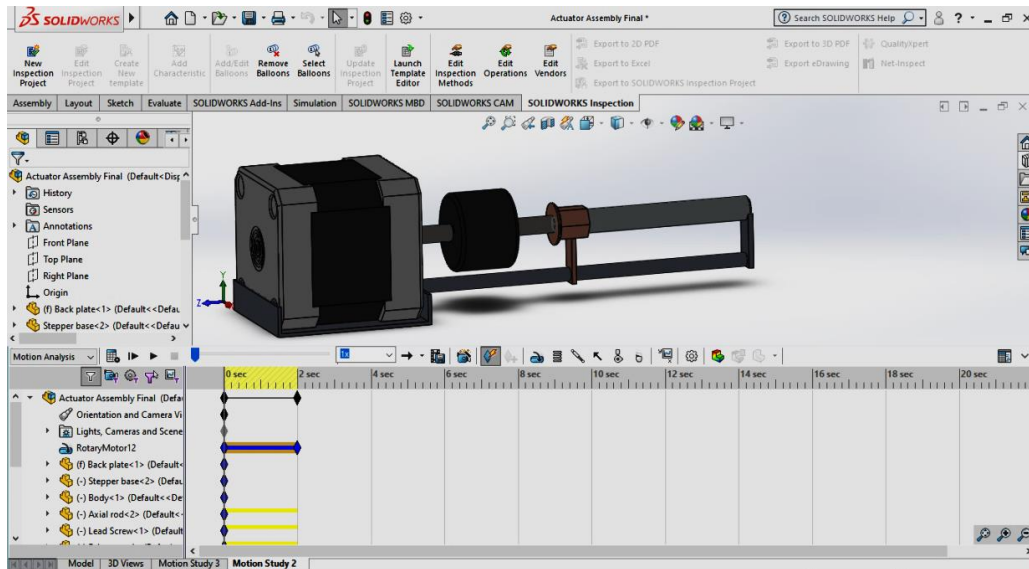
SOLIDWORKS Brake pedal actuator motion analysis setup
